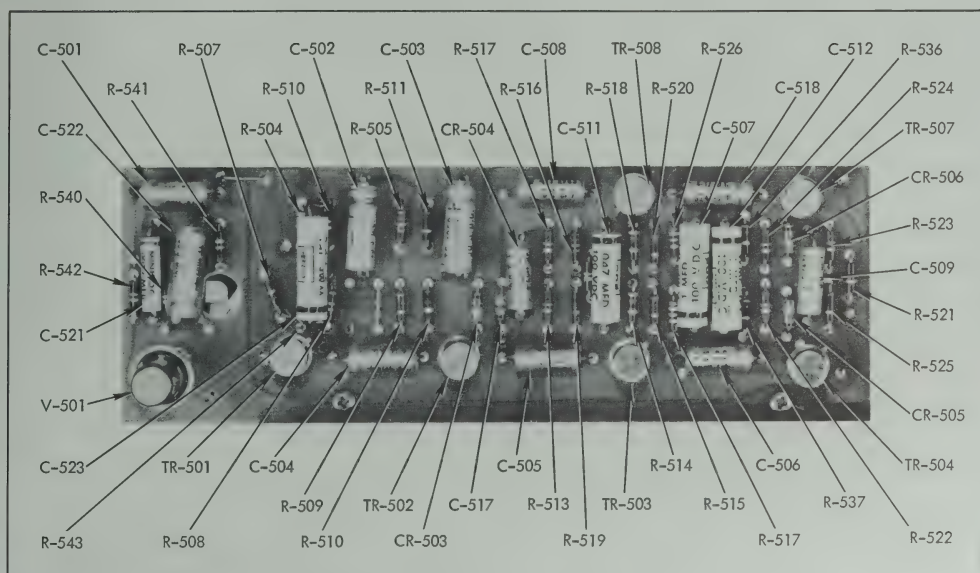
X-AXIS PRINTED CIRCUIT BOARD
